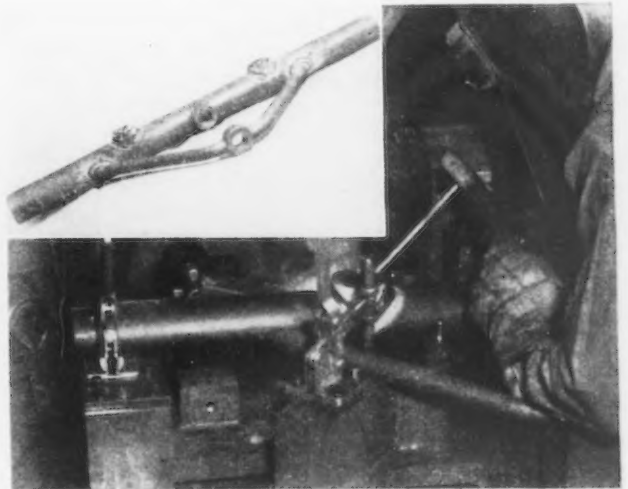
Welding .45 C. stay rod to .25 C. seamless tubing to form tractor axle. Courtesy International Harvester Company.
